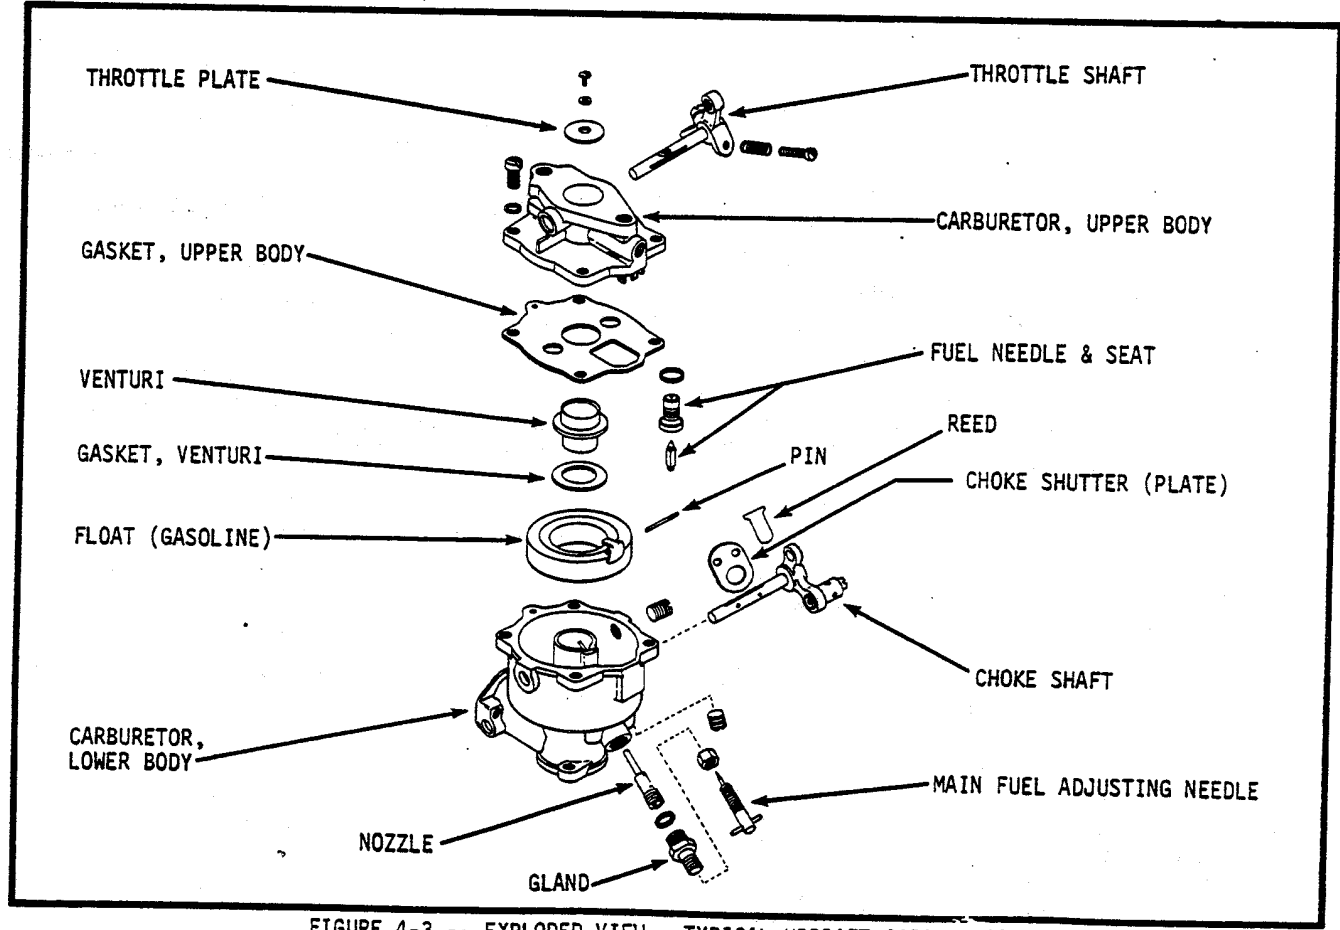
EXPLODED VIEW - TYPICAL UPDRAFT CARBURETOR
